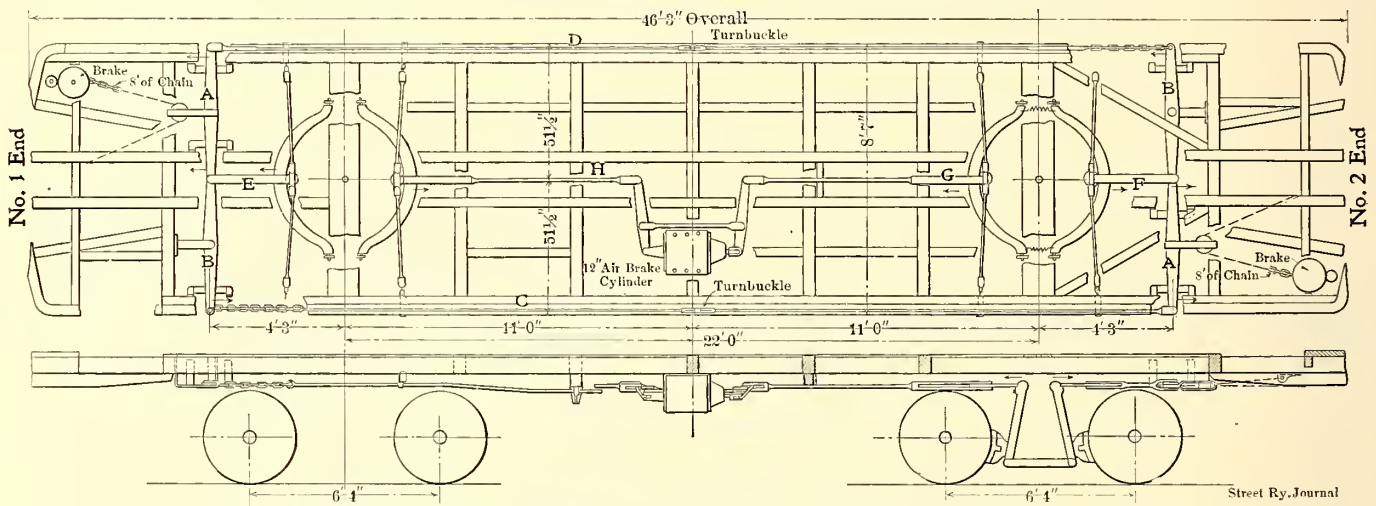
DIAGRAM SHOWING ARRANGEMENT OF BRAKE RIGGING
